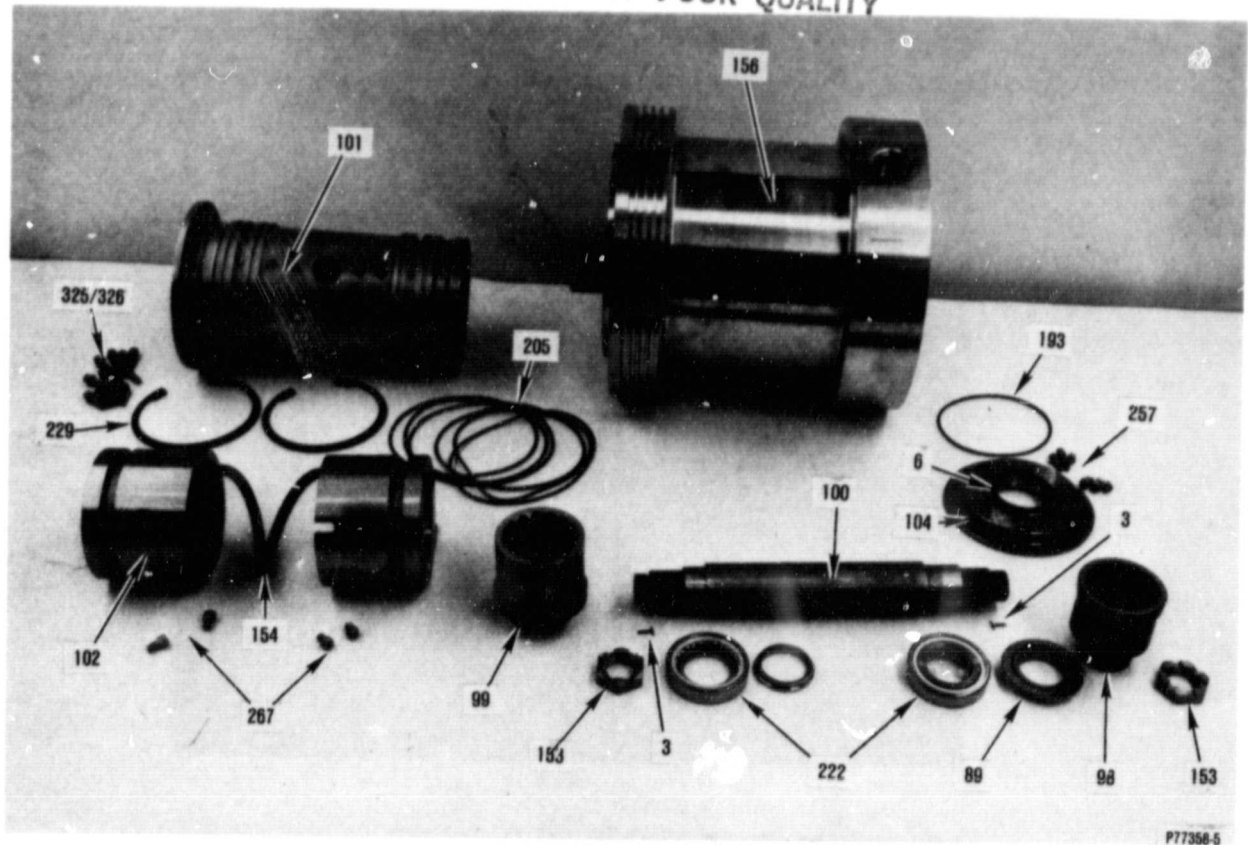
Torque-Tube Hardware and Assembly. (Find Numbers Refer to Drawing 3553131.)
